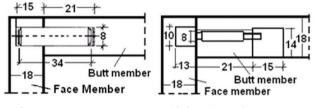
Small cam fastener and its parts (mm) used in tests.
